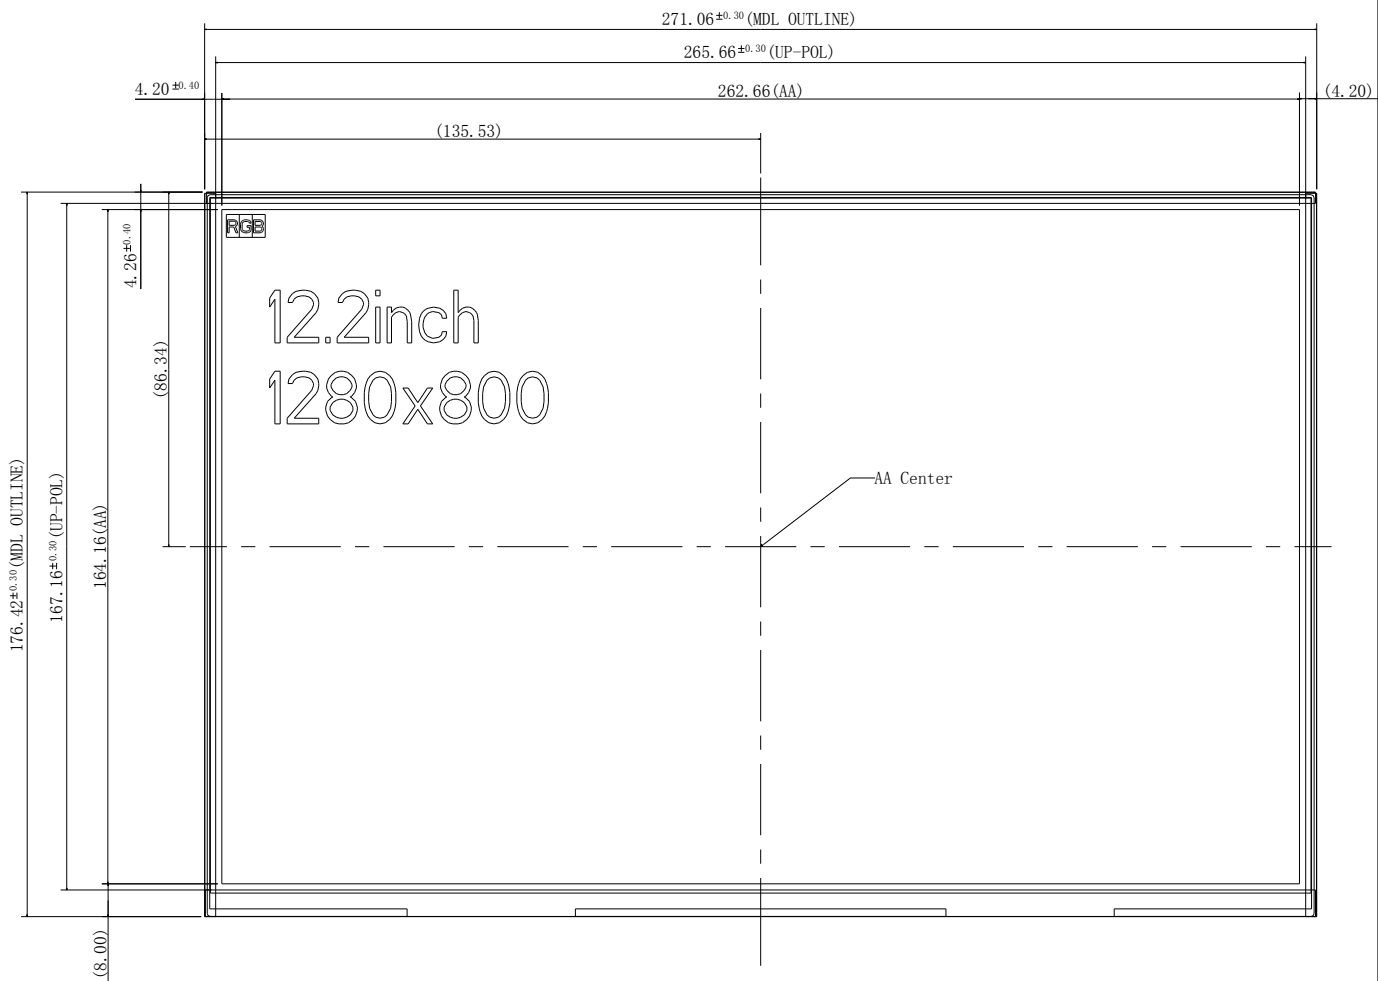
TFT-LCD Module Outline Dimensions (Rear view)
